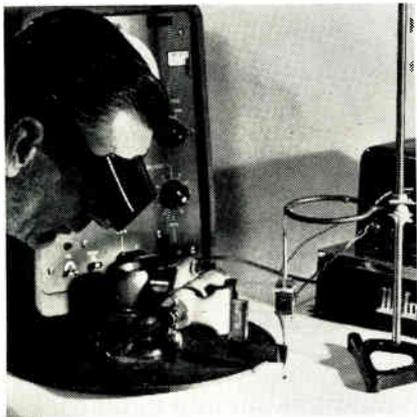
Welder operating at 2,000 watts welds foil to thicknesses of 0.080 in.
